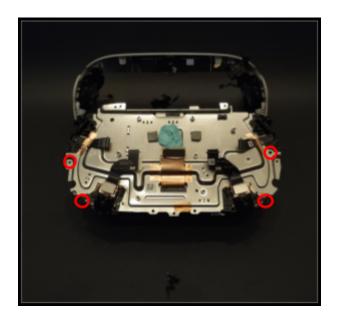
Removal of the midframe and battery, front view of stereo speakers.
